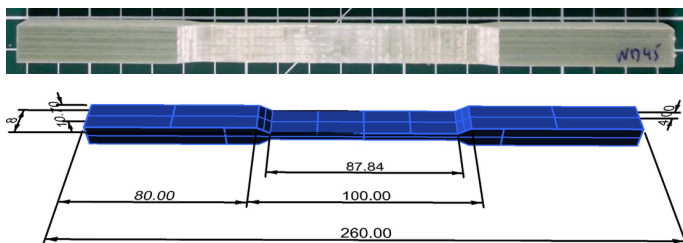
WD4 coupon geometry with straight gauge section. Width 8 mm.
